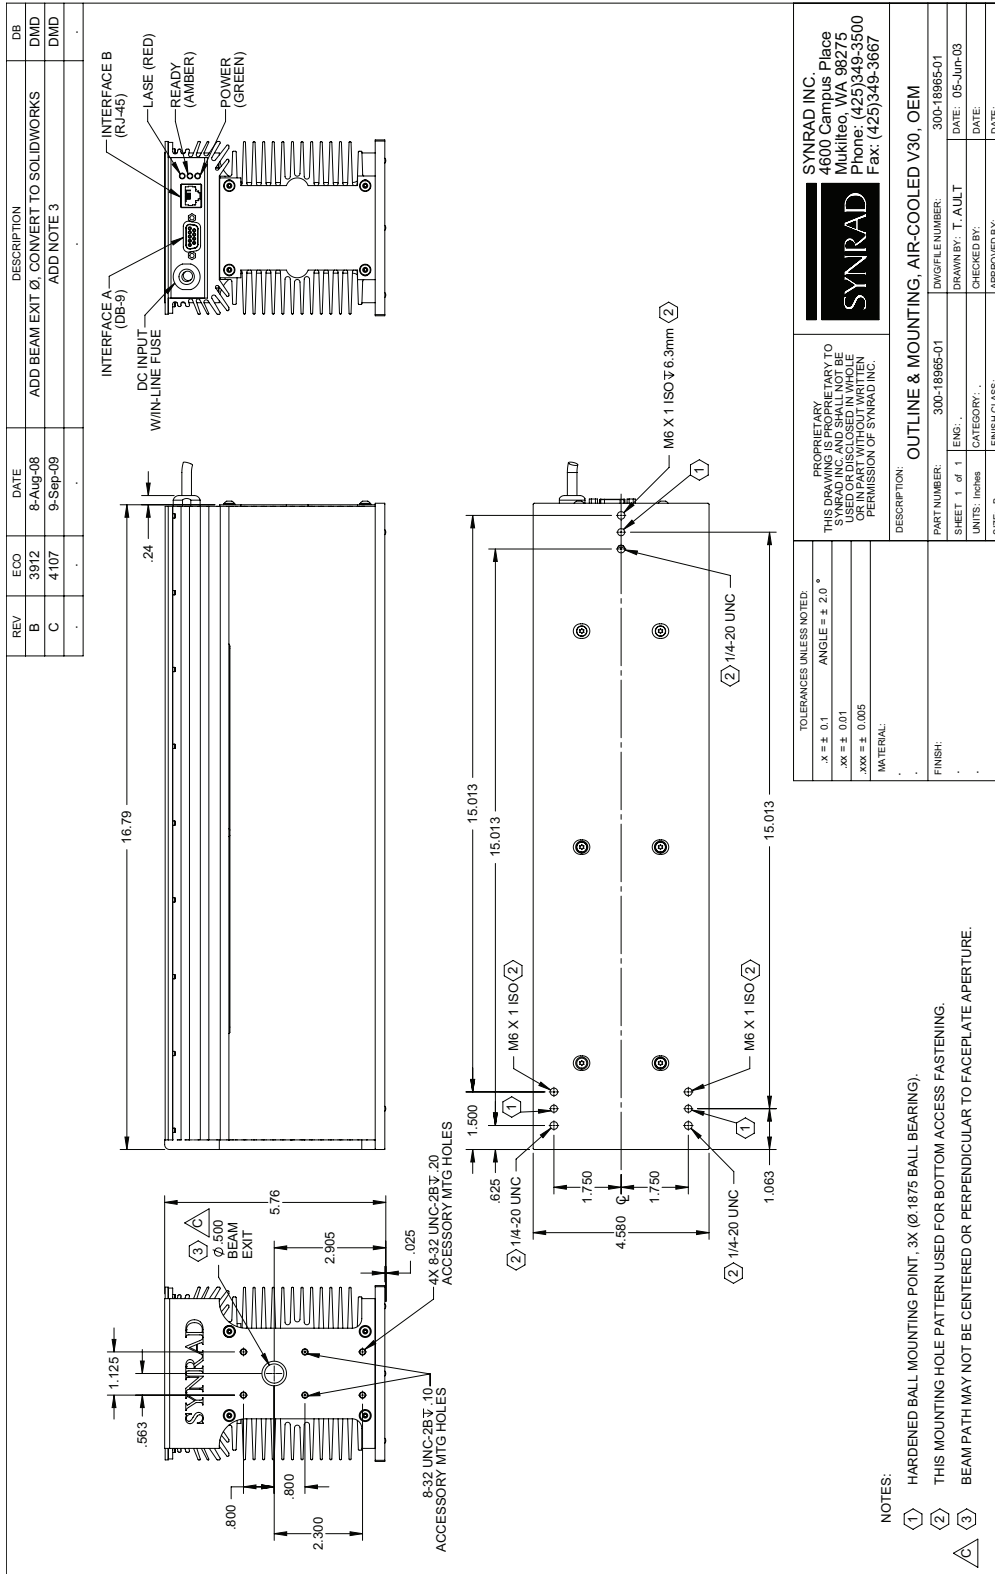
OEM v30 air-cooled package outline and mounting dimensions
